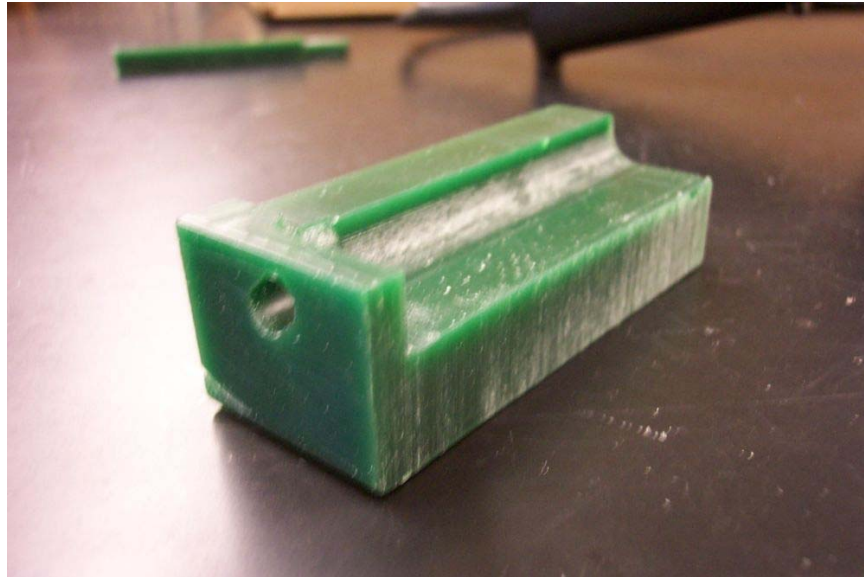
The base mold for 2<sup>nd</sup> part.
